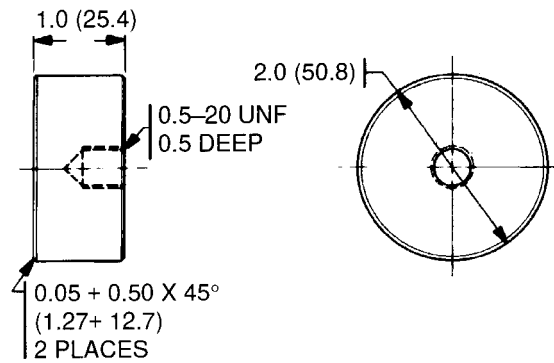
Guide Tool Assembly (Sheet 2 of 3)
